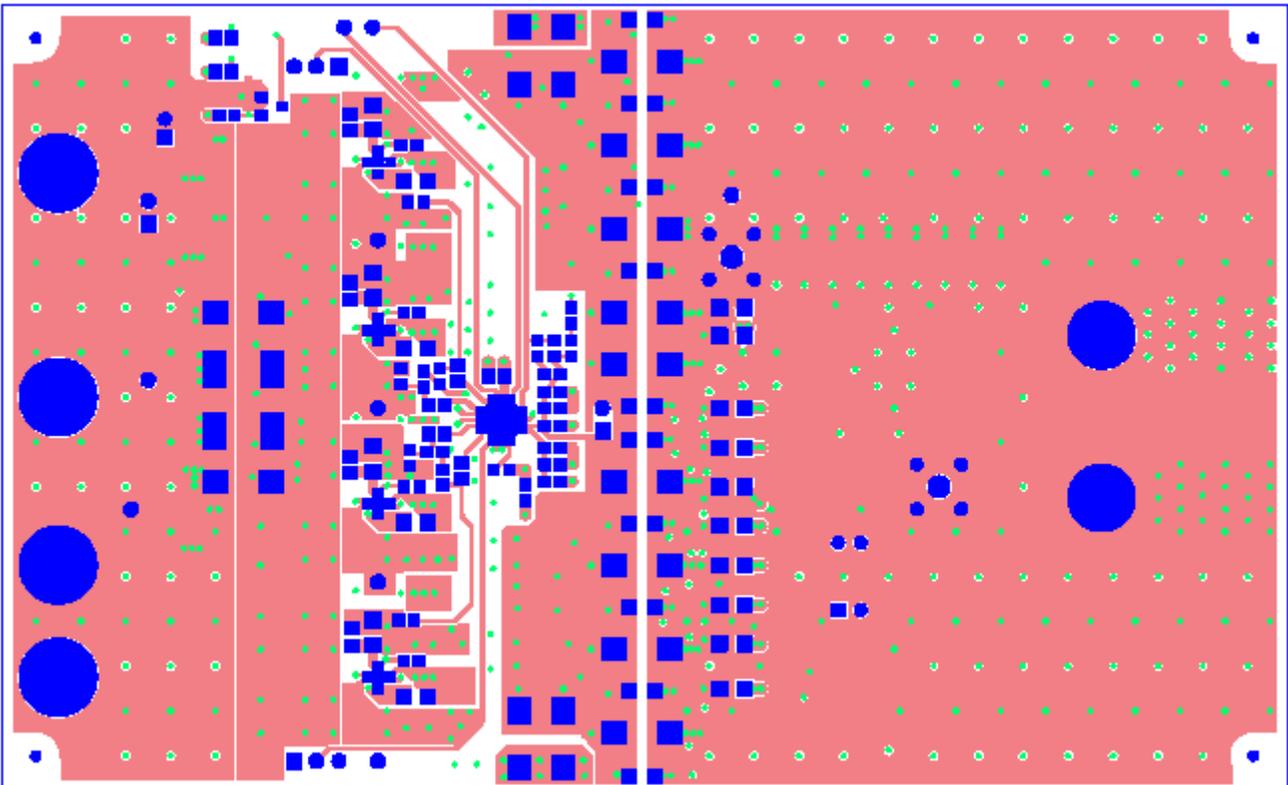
BOTTOM LAYER COMPONENT SIDE
